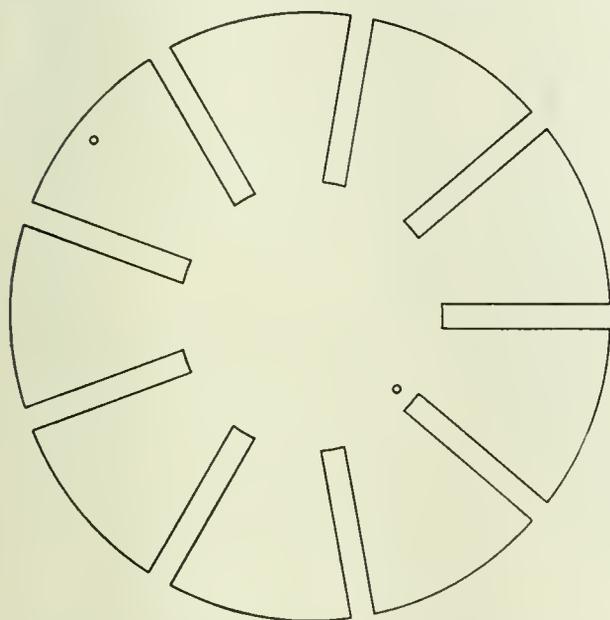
The card on which the wire is wound. It is drawn exact full size.
